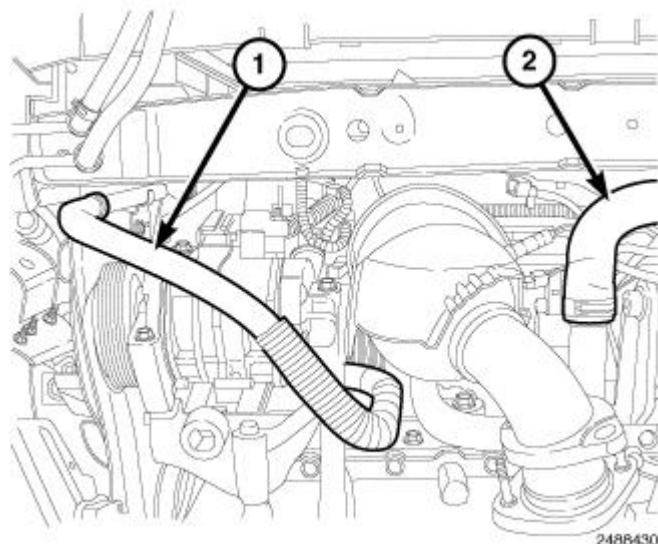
Identifying Heater Return Hose & Lower Radiator Hose
